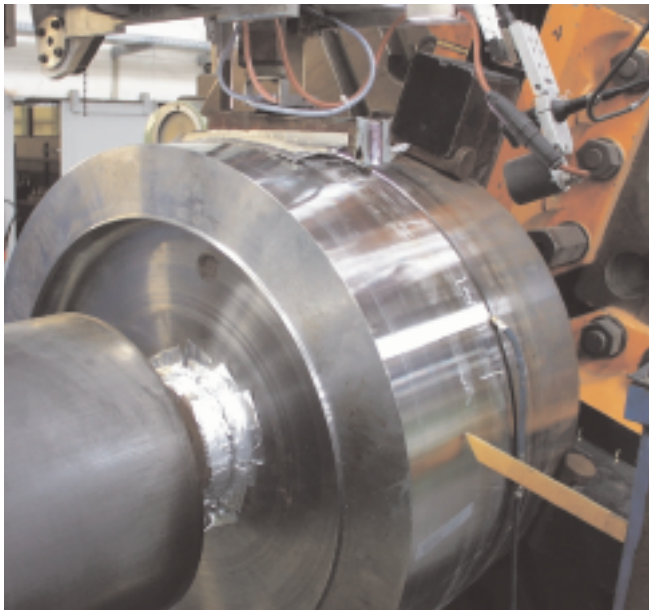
Narrow gap welding of 840mm diameter forgings
